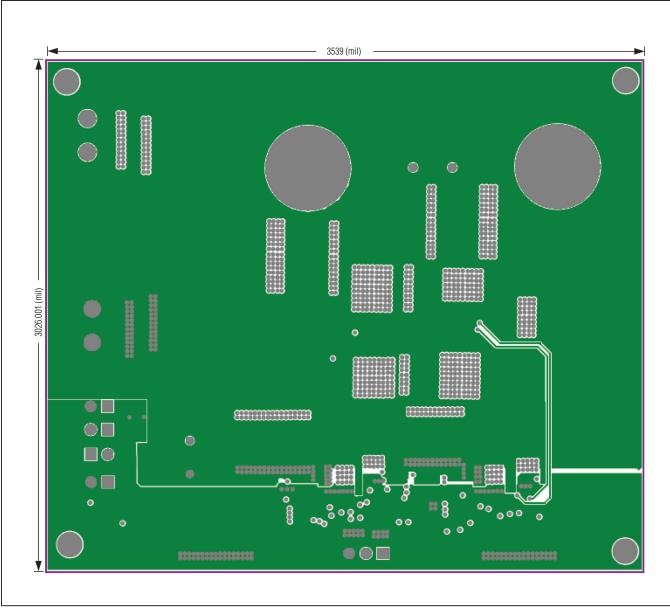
MAX8686 EV Kit PCB Layout—Layer 3 (VIN and AGND)
